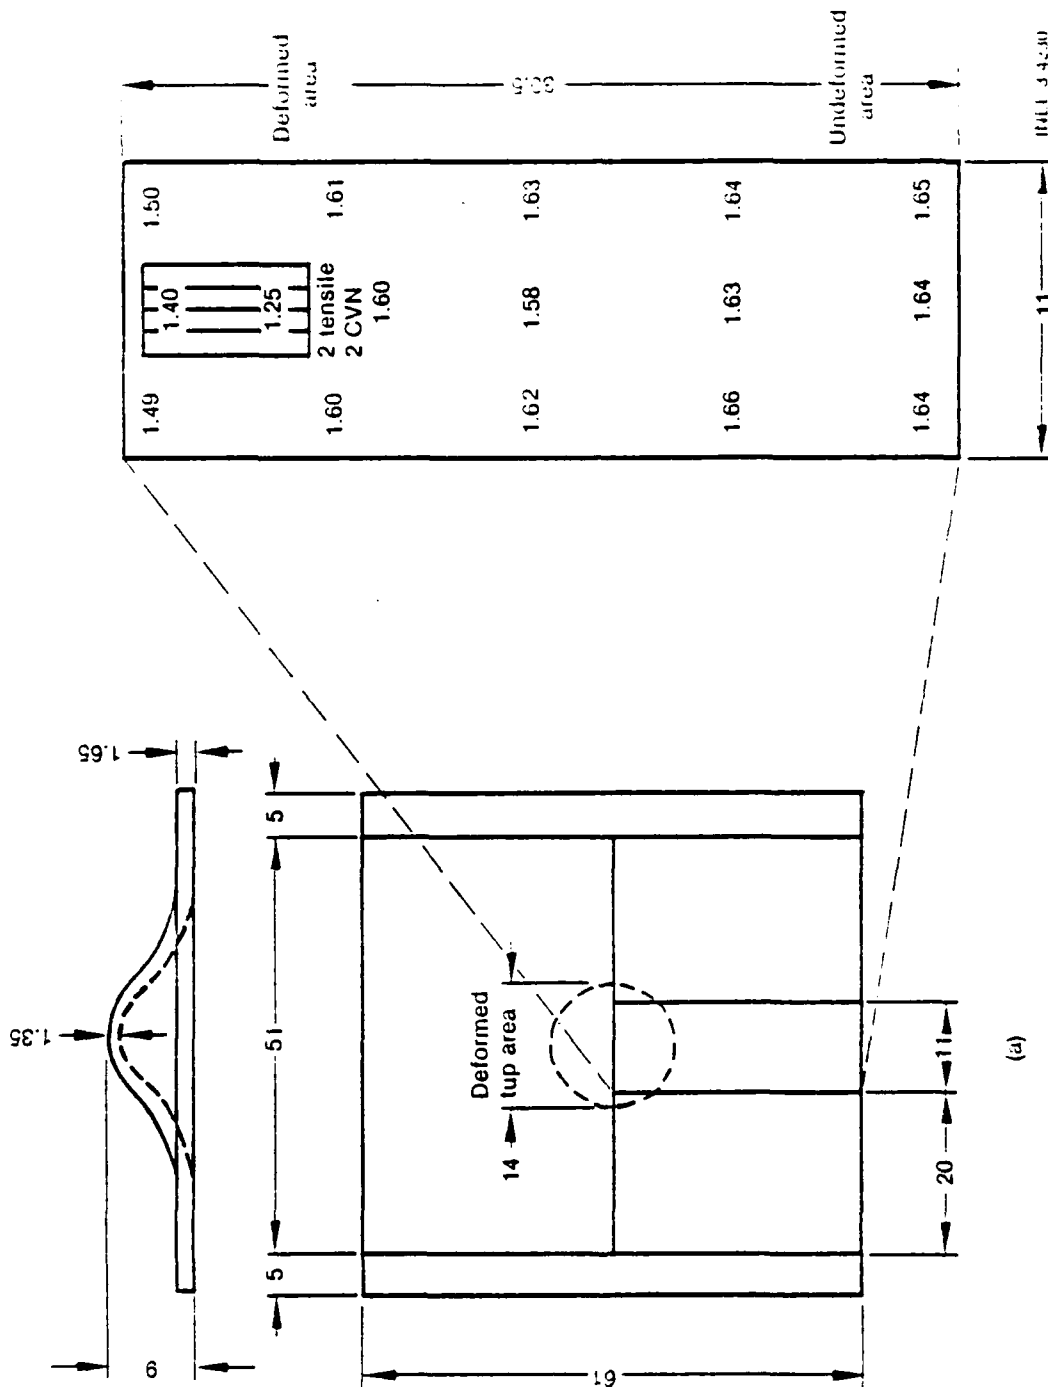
Thickness Measurements (mm) and Location of Test Specimens Removed from Plate DII-20-14-83-16-160.
